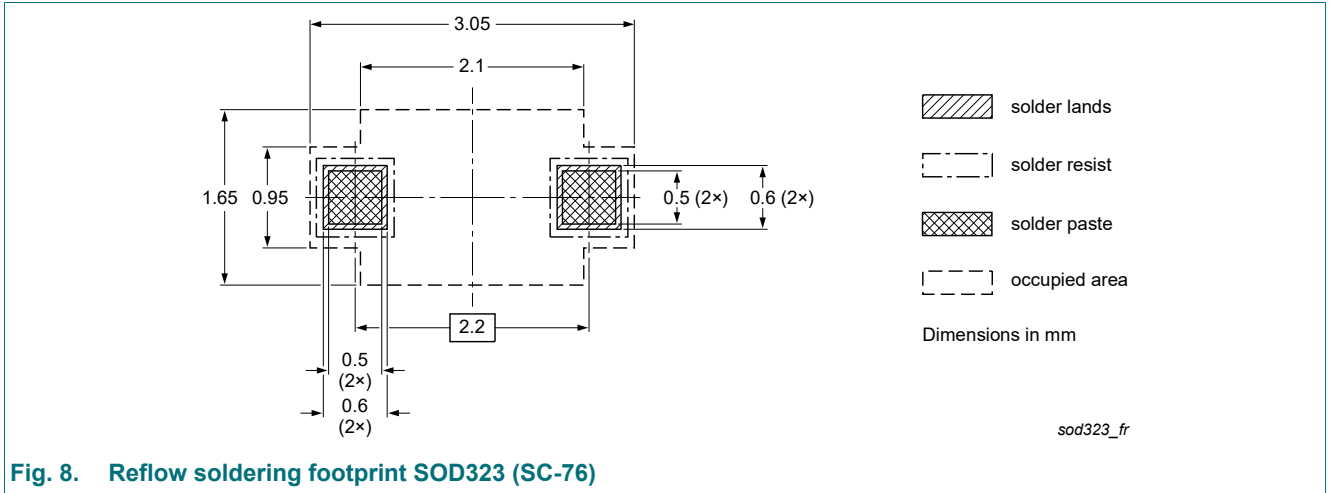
Reflow soldering footprint SOD323 (SC-76)
